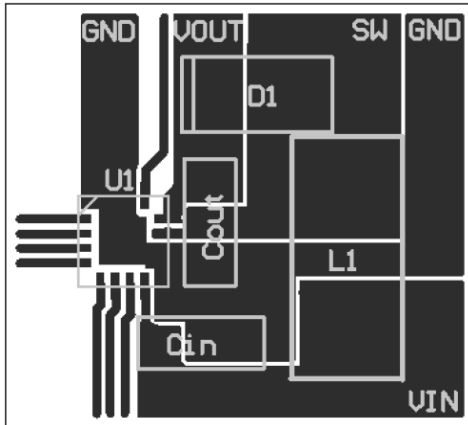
Example CM9321 PC Layout and Component Placement for Standard Application
